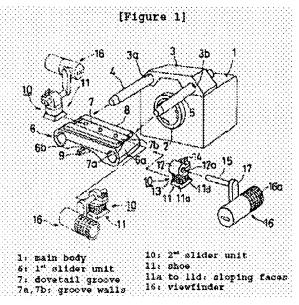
An exploded perspective view showing the viewfinder installation device for a camera pertaining to the present invention.
